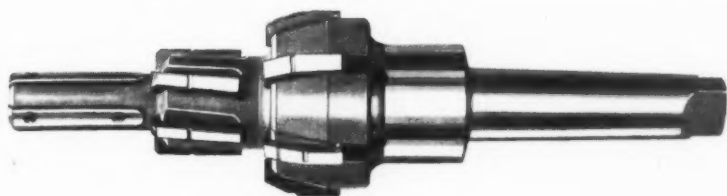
Combination Tool which Simultaneously Finishes the Spherical Seat and the Straight Hole in Front of it (See Fig. 2)
